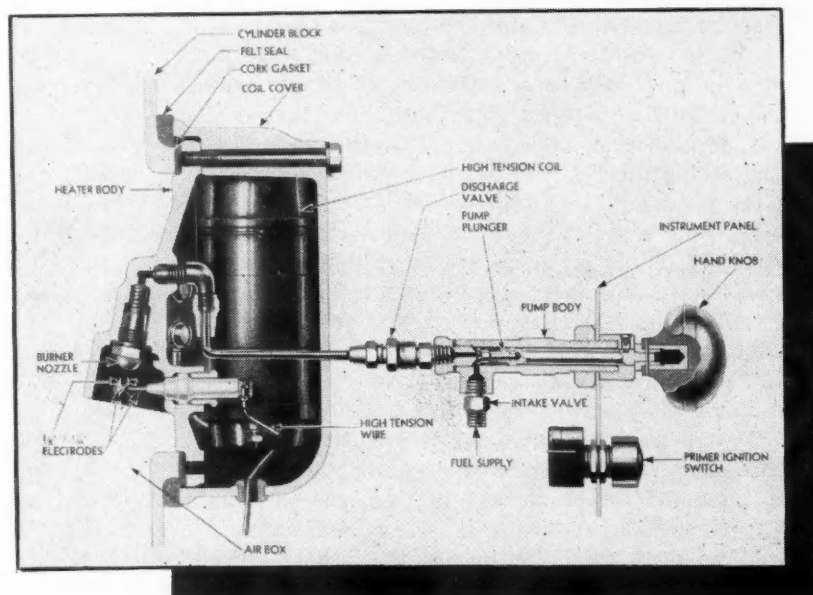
Sectional assembly view of flame-primer installation on General Motors two-stroke engine
